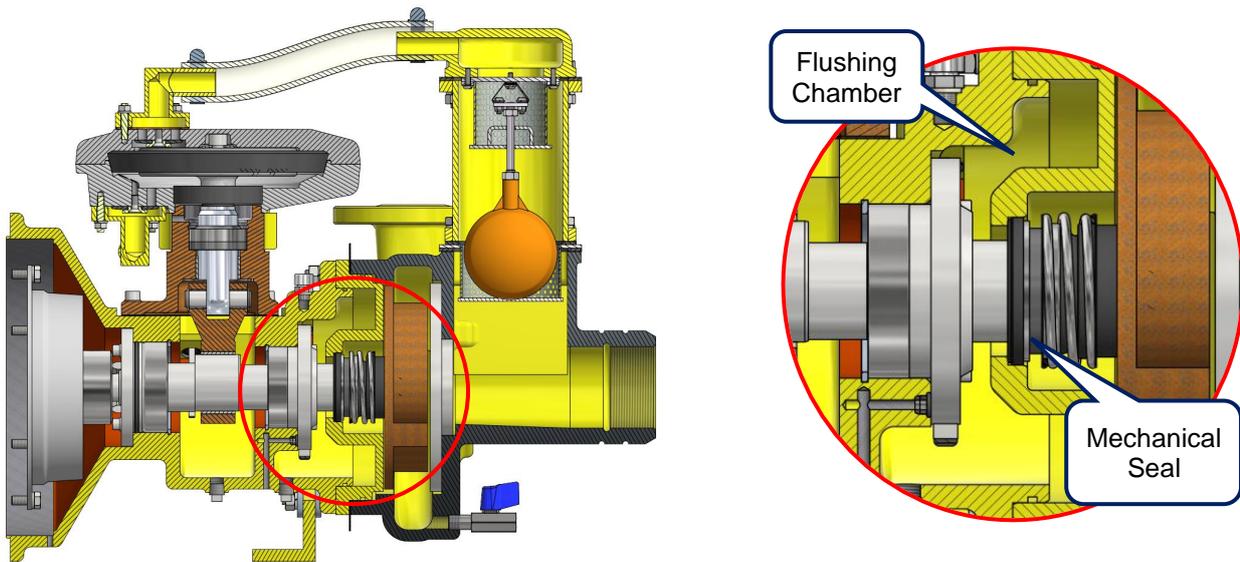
A mechanical seal comprising of two components; a stationary seat pressed into the casting and a rotating spring-loaded actuator that pushes against the seat. Both have highly polished silicon carbide surfaces which are in constant contact, this creates a seal between the worked liquid and the oil filled chambers of the body unit. In normal operation, the worked fluid helps to cool the mechanical seal. However, if there is no worked liquid within the pump and the pump is still operating (otherwise known as running dry), the oil filled flushing chamber dissipates heat generated by the mechanical seal. If the body unit has been running dry for periods of 5 minutes and over, then stop the pump and allow the unit to cool for a minimum of 15 minutes. This is to stop any cracking of the casting.
